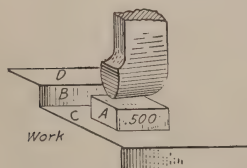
Use of size block. A, $\frac{1}{2}$ -in. size block; B, shoulder; C, finished surface; D, surface to be finished $\frac{1}{2}$ -in. from C.
